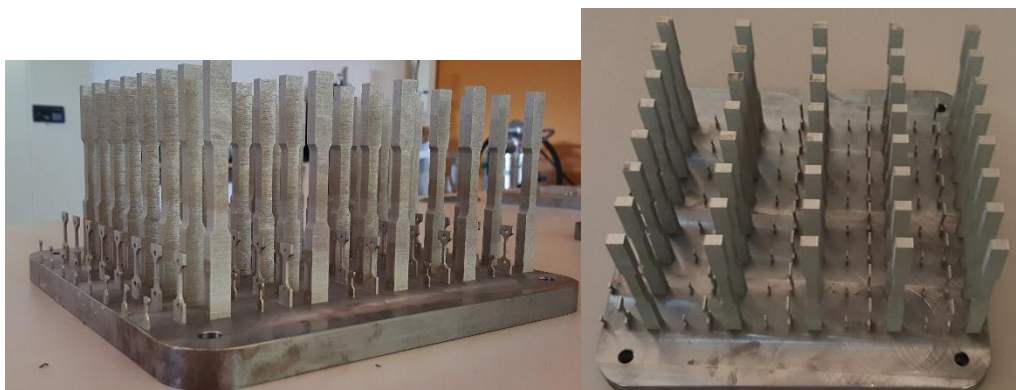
Side and top view of SLM specimens on the build plate. A total of 120 specimens, 40 each of ASTM, MT1 and MT2 specimens were built
